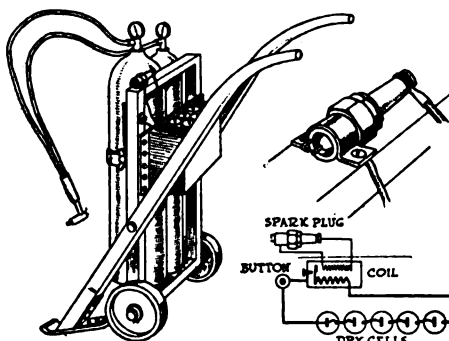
Welding tank truck with spark plug for igniting flame
